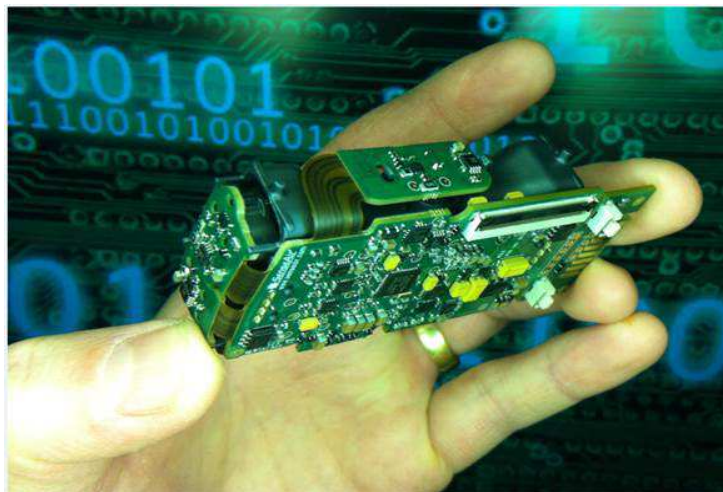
Photograph of the assembled sensor cavity and its electronics.
